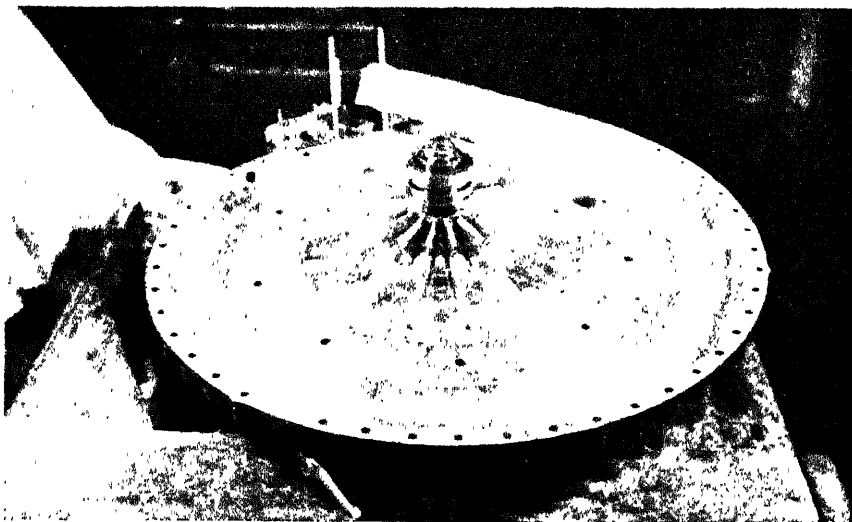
VIEW SHOWING IMPELLER ASSEMBLY FITTED TO HALF OF SUPERCHARGER CASING
